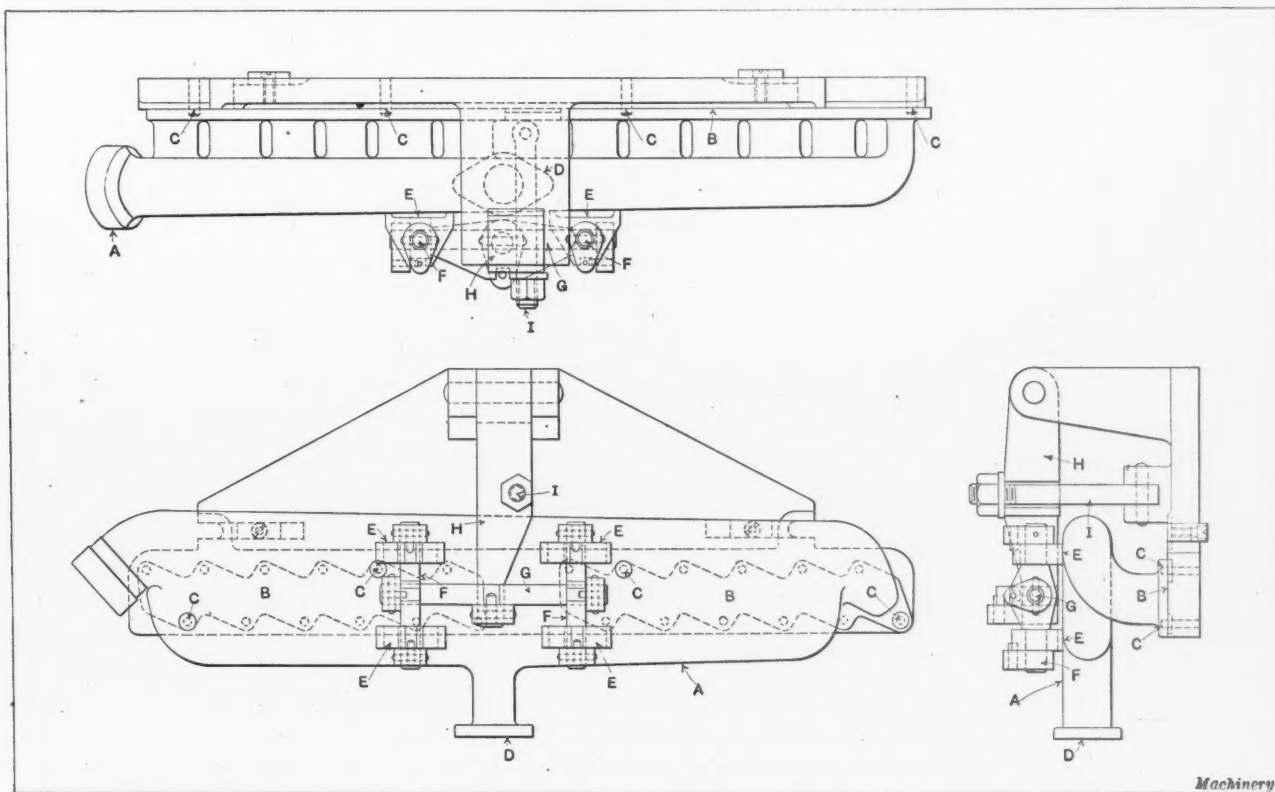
Milling Machine Fixture with Equalizing Clamping Mechanism for holding Chandler Manifolds while milling the Carburetor Flange
